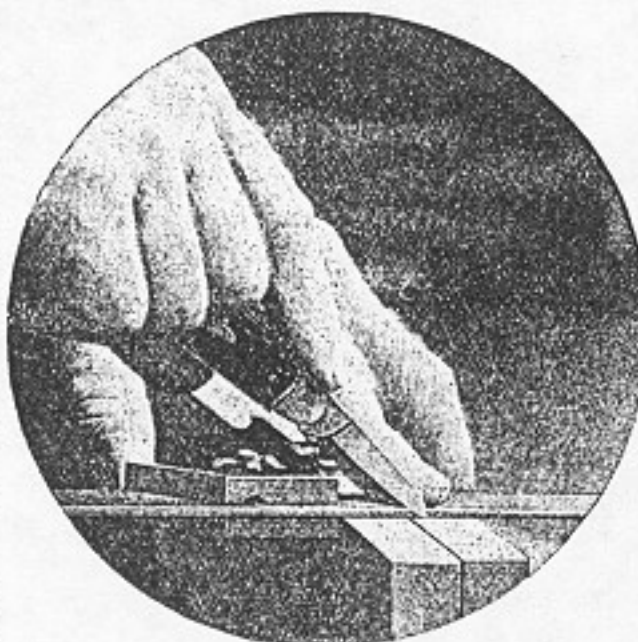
Squaring the edges of two boards to locate the position for boring dowel holes.
